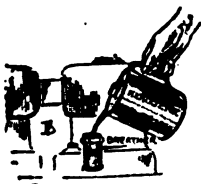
Flush the crank case with kerosene. Pour through the place along side of engine where lubricating oil is poured in — called the "breather."
